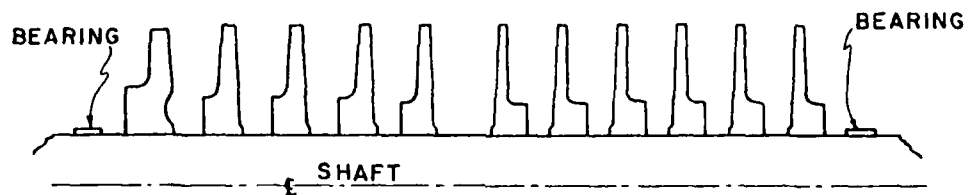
Schematic of 11-Stage Centrifugal Compressor
